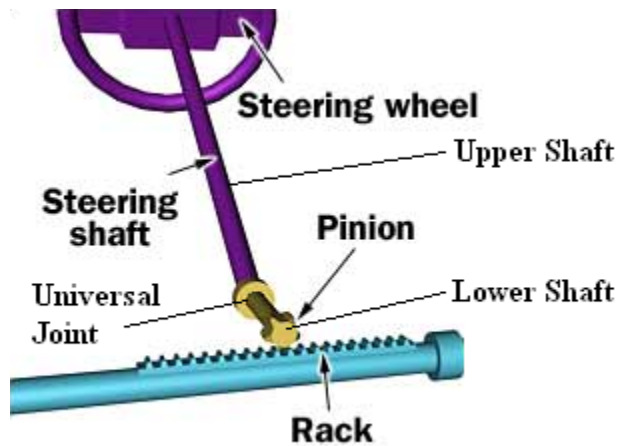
Steering shaft. (Nice, How Car Steering Works, 2001)
